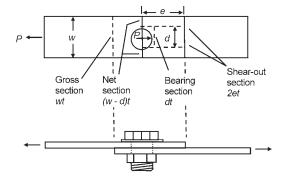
Single-shear joint. Source: Ref 8.2
